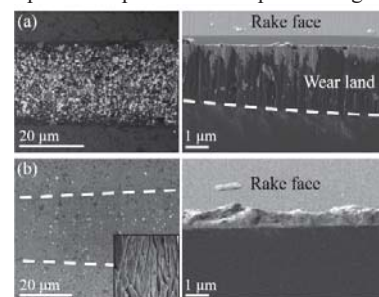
Surface morphology and tool edge of diamond cutting on (a) normal and (b) implanted tungsten carbide [Error! Reference source not found.]. The inserted figure shows the chip surface.
